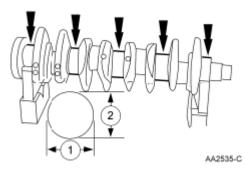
Identifying Measuring Directions Of Crankshaft Main Bearing Journal Diameter
